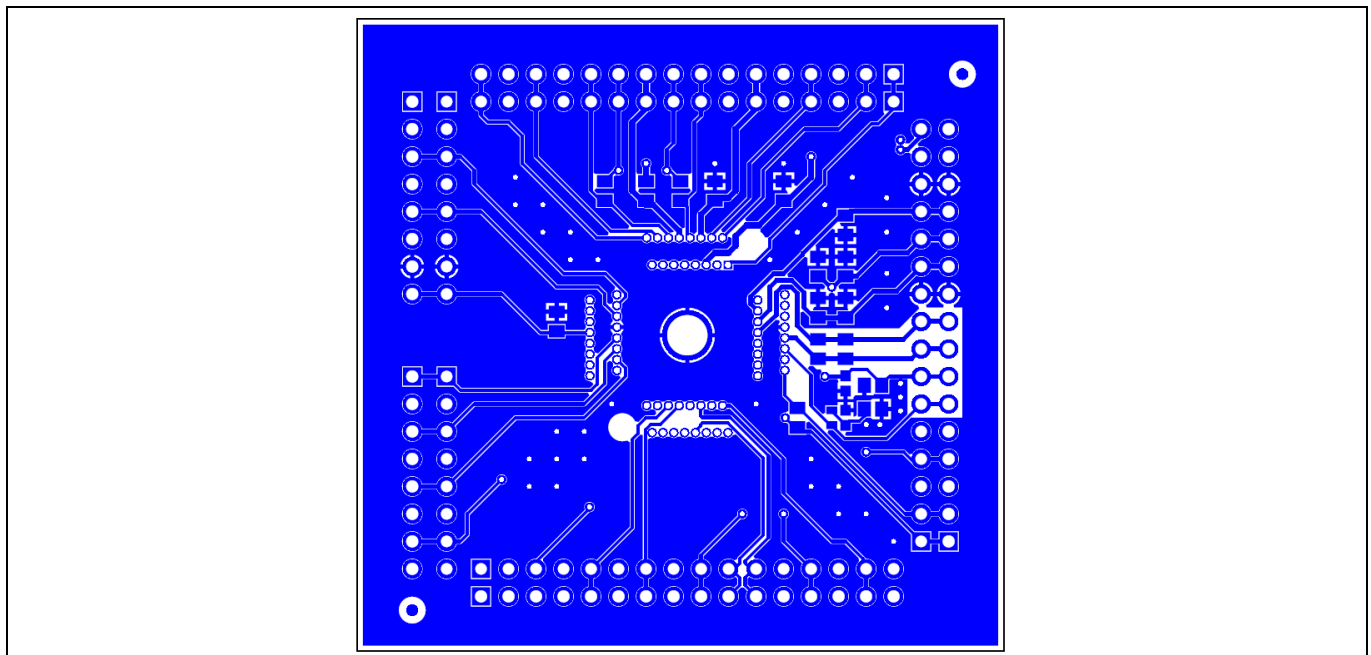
TLE988x_TLE989x LQFP64 Socketboard, Bottom layer
